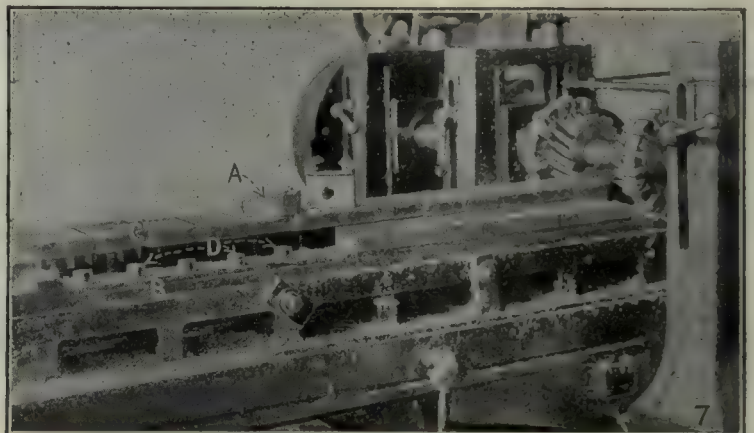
MILLING OFF CORNER AND FACING END OF BLANK
